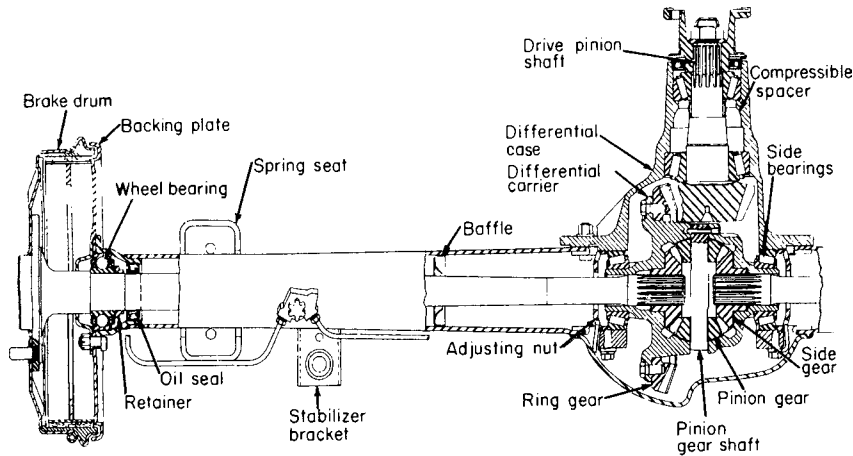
Rear axle. (Oldsmobile.)
